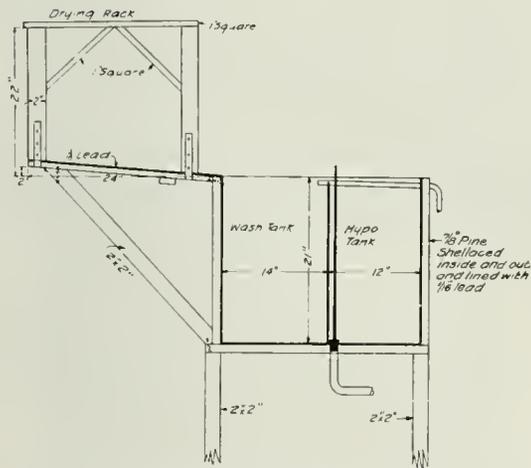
Side View of Hypo and Wash Tanks and Drying Racks, Dark Room No. 2
